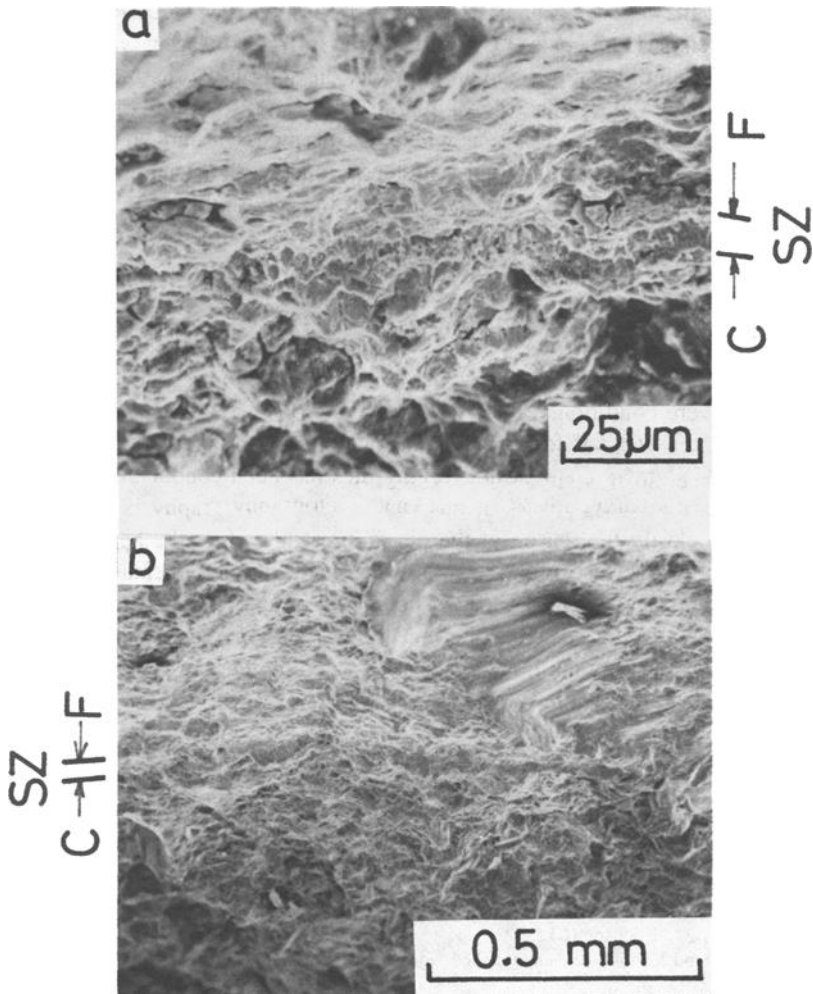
Stretched zone observed on fracture surface of hot forging die: (a) connecting rod; (b) reverse gear.
